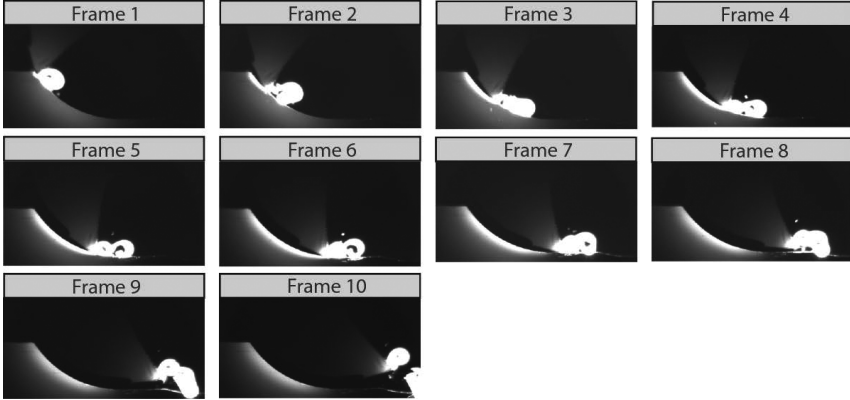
Recorded IR imagery for one exemplary cutter engagement
